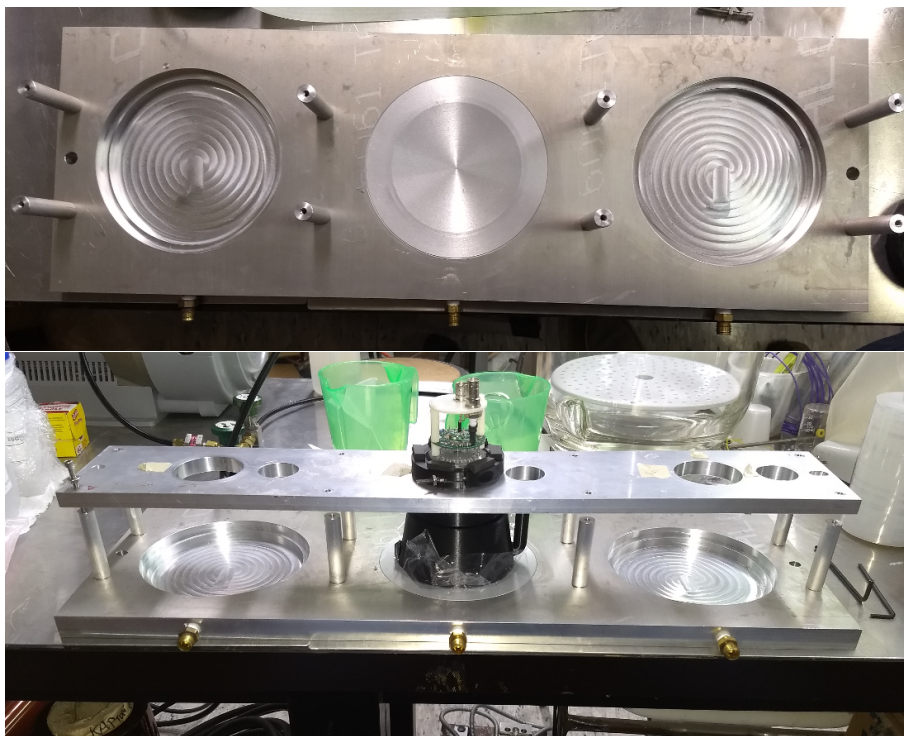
Top: The 3×1 prototype bottom plate for gel pouring at TRIUMF. The porous aluminium bottom part of the mould is installed in the middle slot. Bottom: The 3×1 prototype gel pouring station at TRIUMF with a PMT installed in the centre. The top aluminium plate holds the PMT in place and pushes it against the bottom plate to form the mould. The gel is poured through the spout on the right side of the PMT holder.
